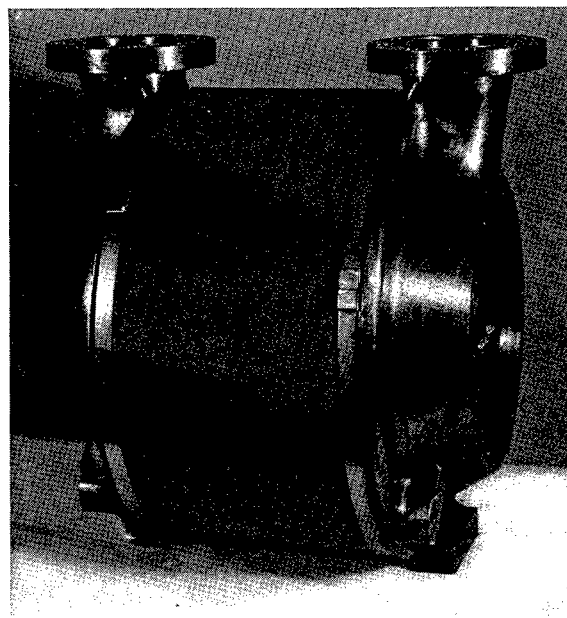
Assembly with both end flanges in place, front view, HP-8D transducer.
